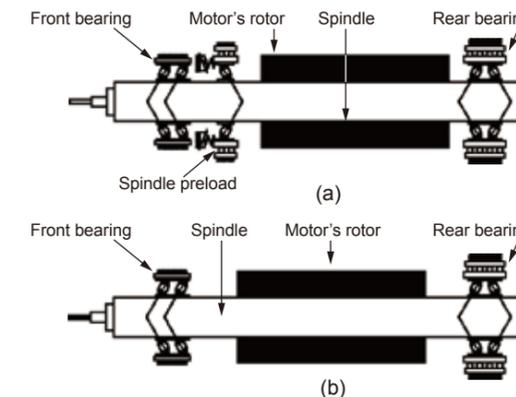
(a) Bearing design with preload spring (b) Bearing design with constant offset preload
